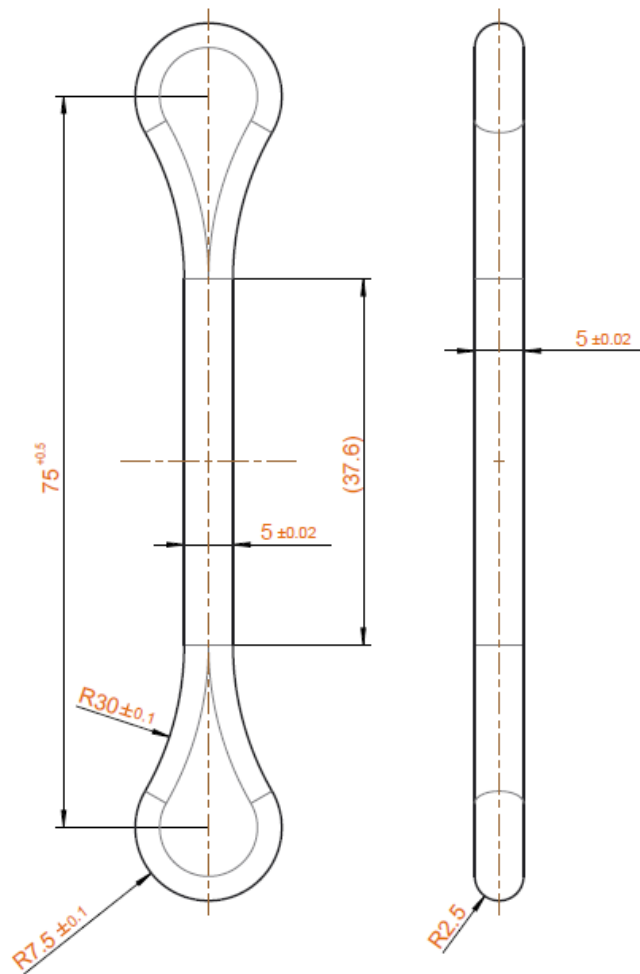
Drawing of one cavity of the round dog bone specimen without runner system.
